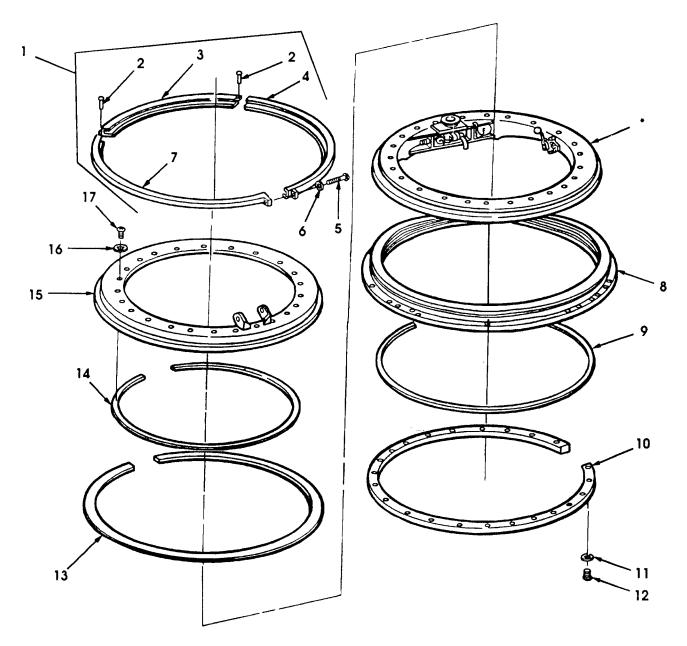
Ring, Mount, Machine Gun, M66 7012810.
